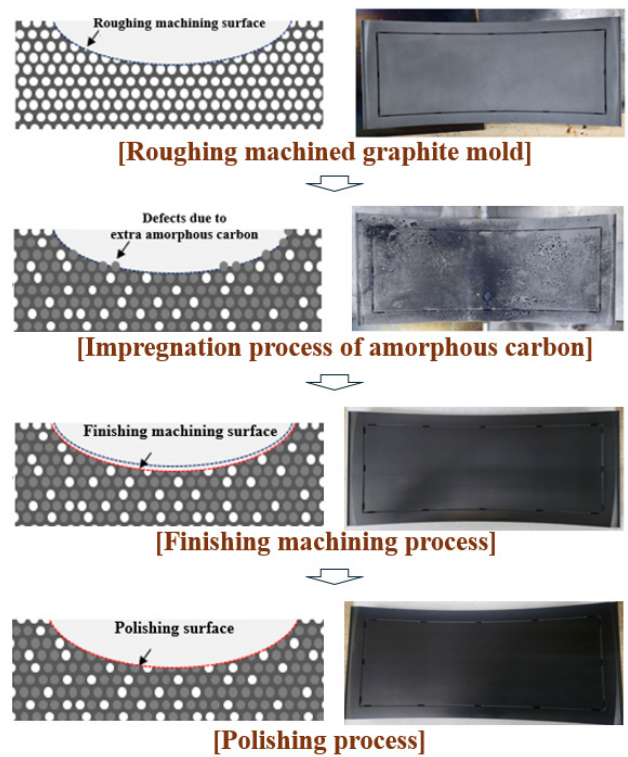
Pictures and concept of impregnation, finishing machining, and polishing process for smooth surface modification using roughing machining graphite mold
